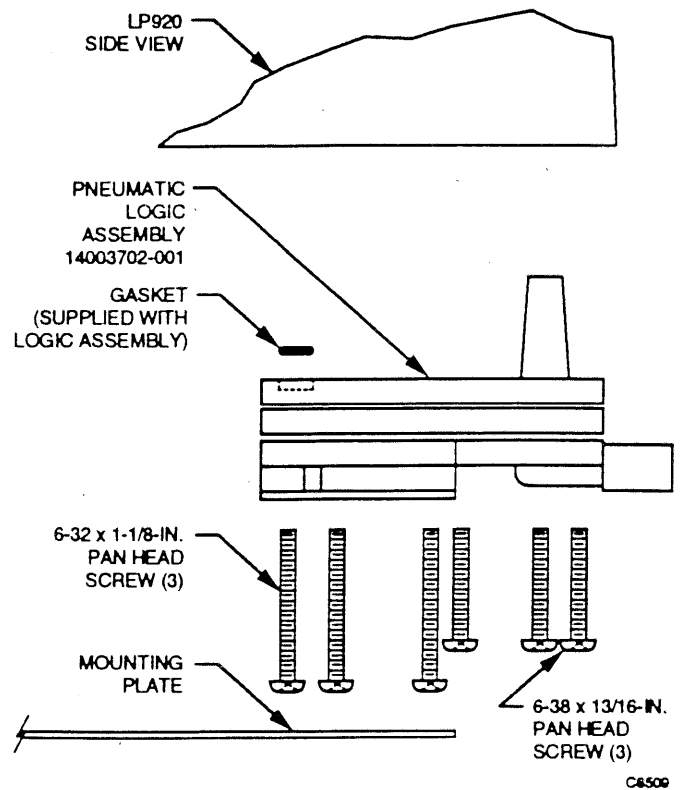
LP920 Exploded View Showing Pneumatic Logic Assembly.
